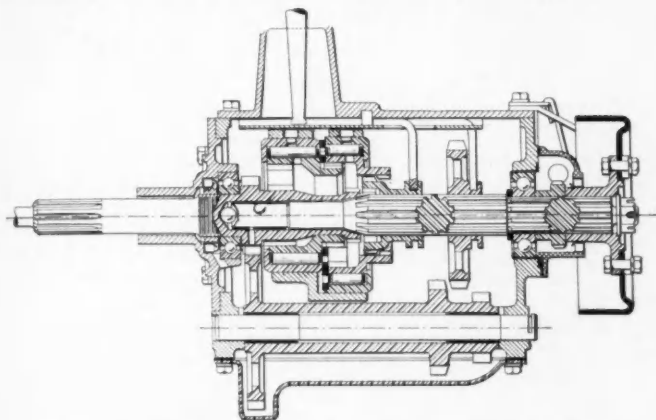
MORSE CHAIN CO. THREE-SPEED GEARSET
